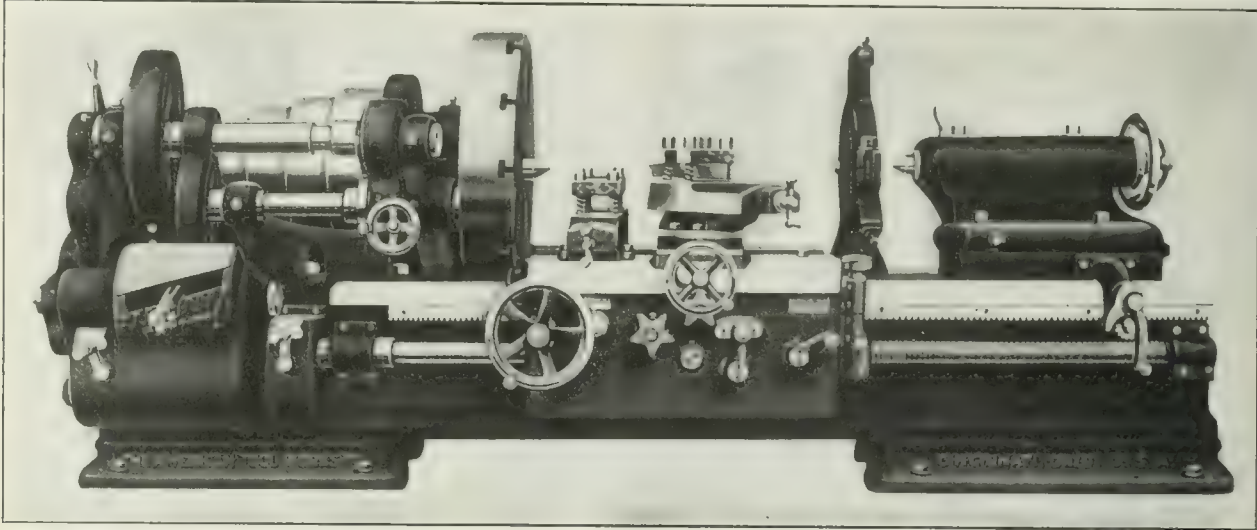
One of the New Cone Pulley Head Lathes Built by the American Tool Works Company, Cincinnati, Ohio.
